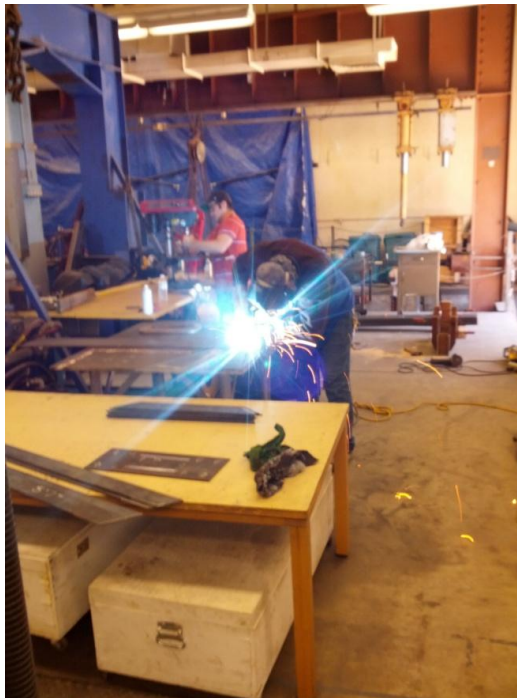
Beginning of Steel Column Construction. Pat Joice is shown welding base plate and Cormac Wicklow is shown drilling holes in back plate.
